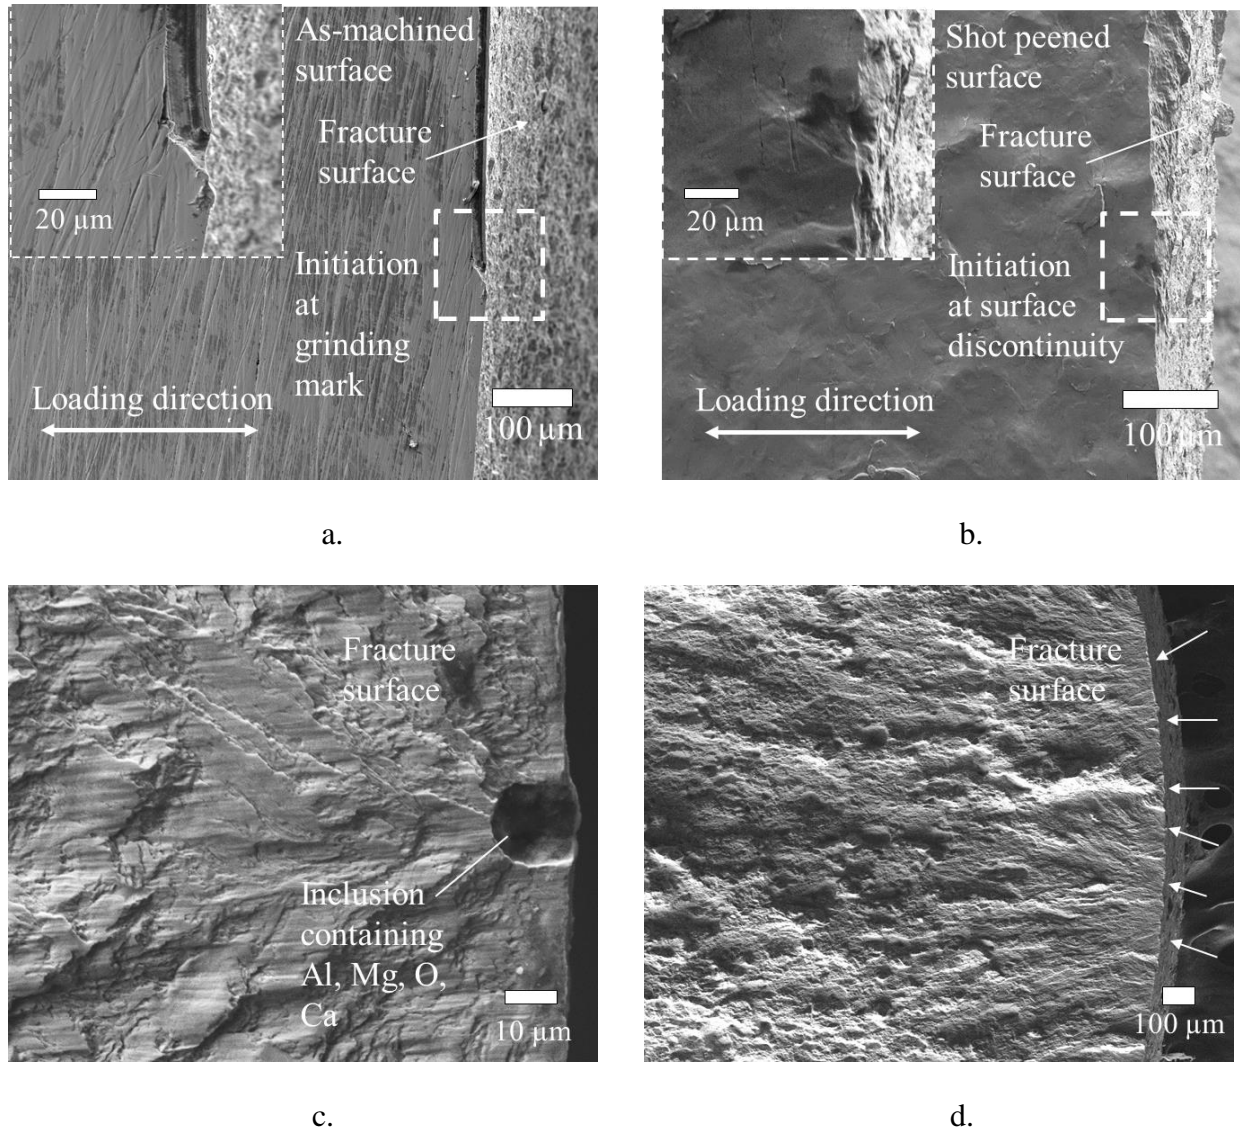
SEM images of fatigue specimens' fracture surfaces showing crack initiating from, a. grinding mark (in an as-machined specimen), b. surface discontinuity (in a specimen treated as per the CW14-8A condition), c. an inclusion just below the specimen surface (in a polished specimen), d. several surface discontinuities in a specimen treated as per the CW14-8A condition and having the lowest fatigue life (arrows represent multiple crack initiation sites)
